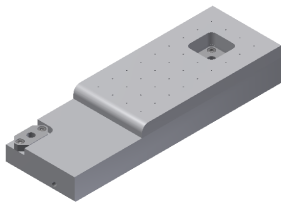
backward inlay dummy jig with extra cut out for PCB's
